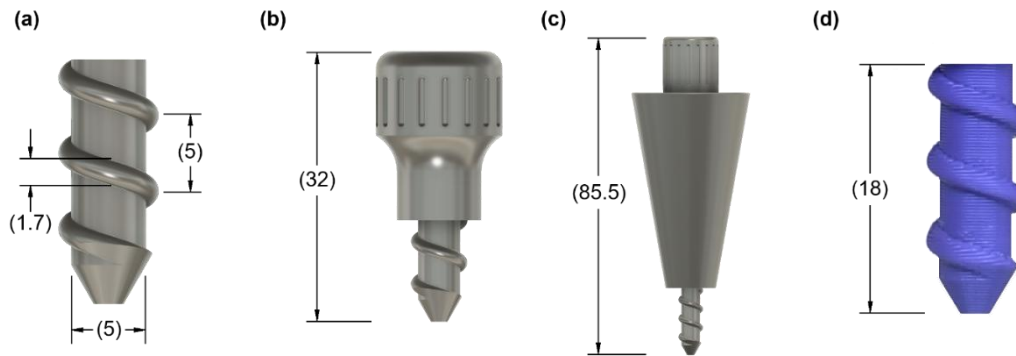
(a) Custom thread and its critical reference dimensions. (b) Custom thread on thumbscrew. (c) Custom thread on tapered plug. (d) As-printed custom thread. All dimensions are in mm.
